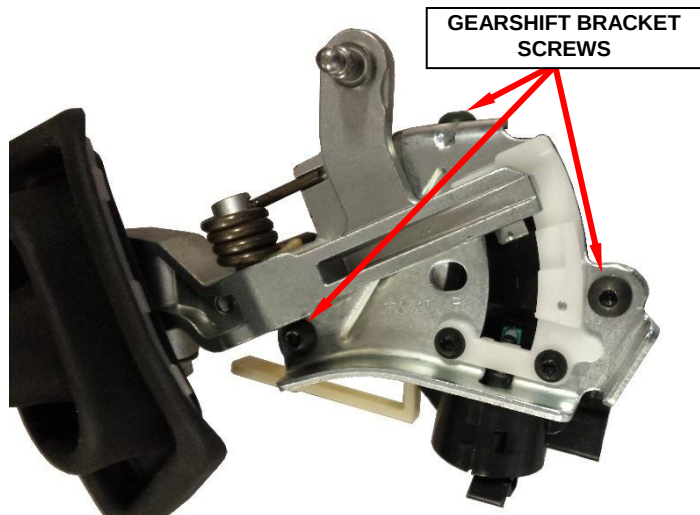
Gearshift Bracket / BTSI Assembly Screws
